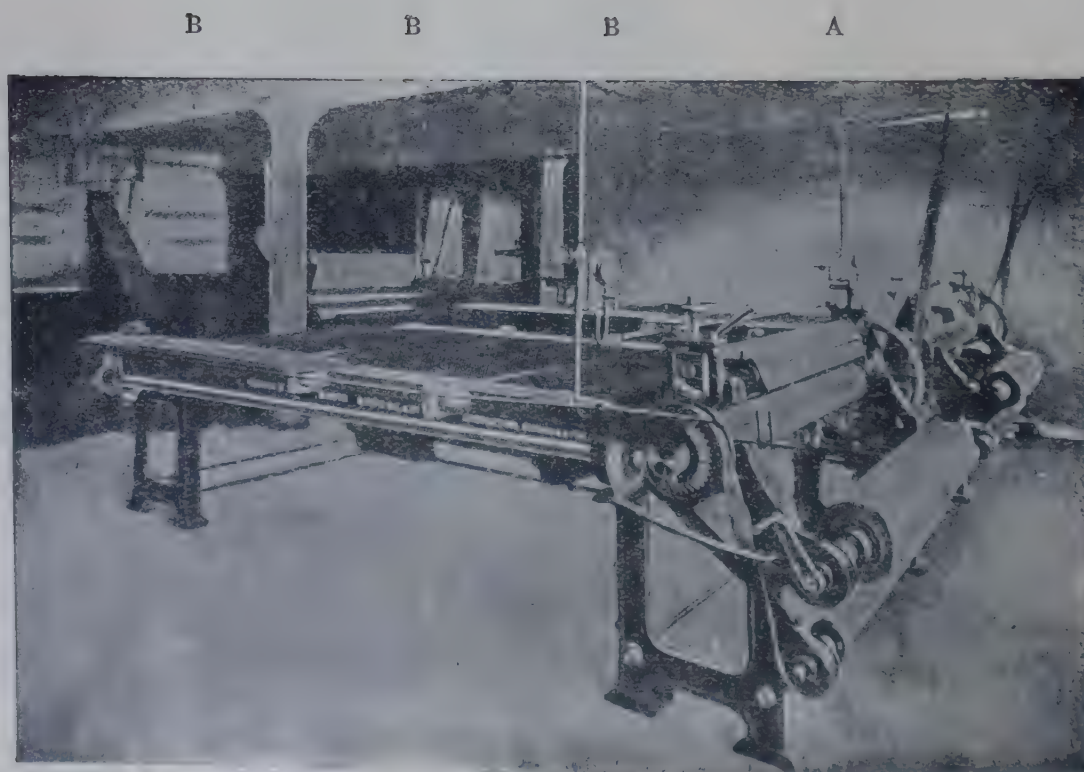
Spreading Machine (for garment cloth, card clothing, fine sheet, waterproofing, etc.).
